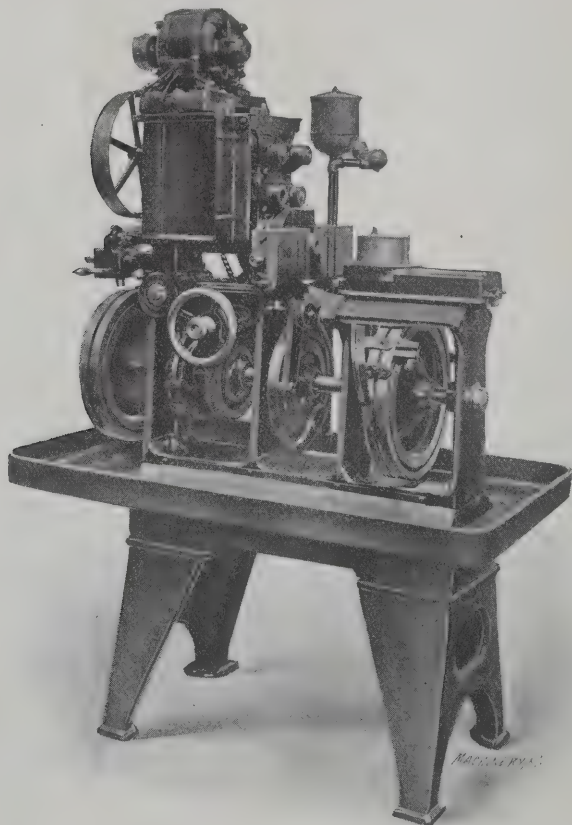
Front View of Motor-driven Automatic Screw Machine, built by the F. E. Wells & Son Co., Greenfield, Mass.
